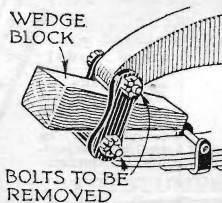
Use a hard-wood wedge like the one shown above when you change spring shackle bolts. It will save jacking up frame
